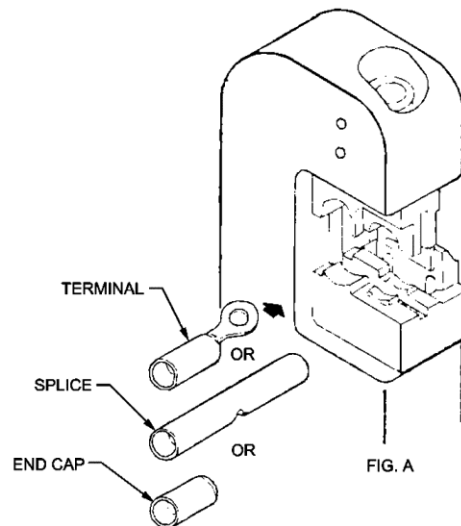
Crimp Tools and Dies (Sheet 2 of 2)
